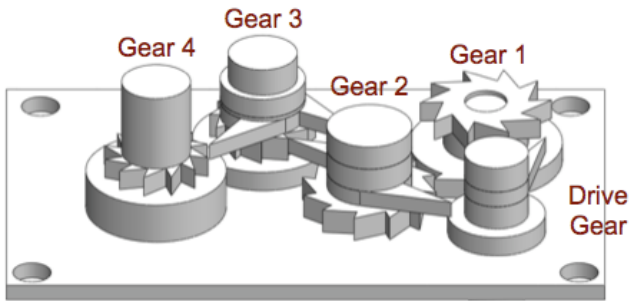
1 RPM of the drive gear will control the motion of the entire watch
